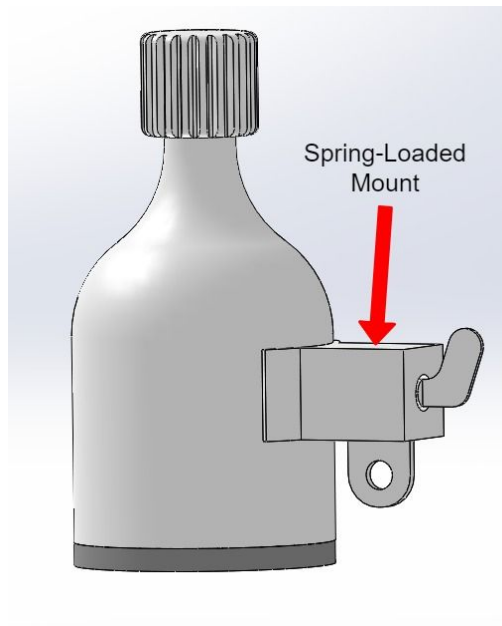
Generator Top Case Component with Spring Loaded Mount
